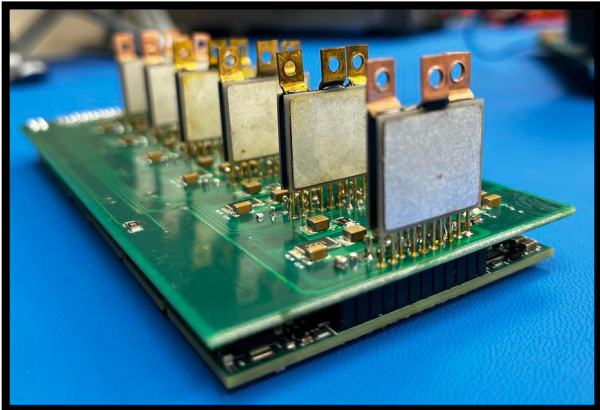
Gate-driver motherboard with the six SiC phase-leg modules soldered on
